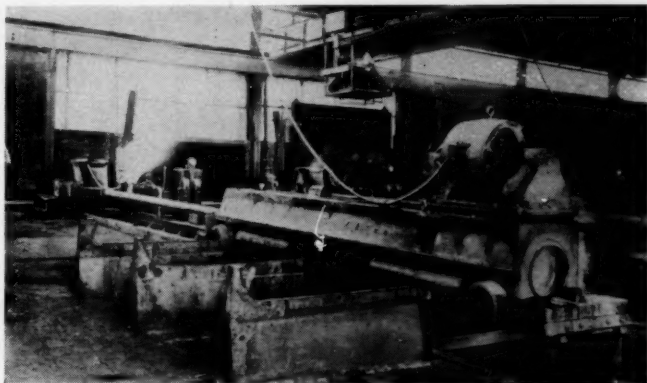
PHOTOGRAPH OF A DELAUDA CASTING MACHINE.
